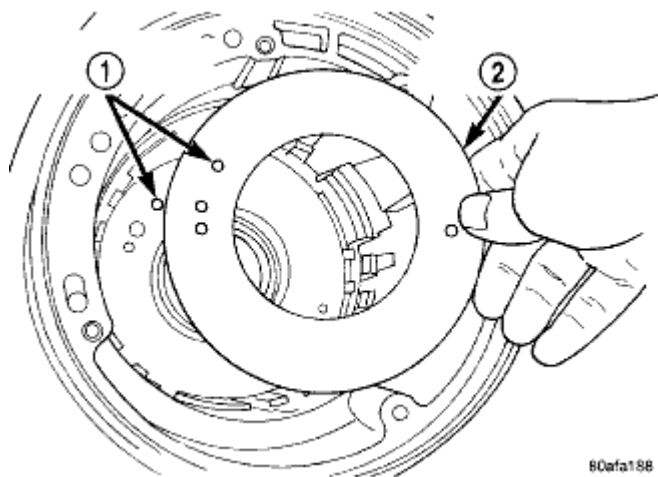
Low/Reverse Piston Retainer-To-Case Gasket
